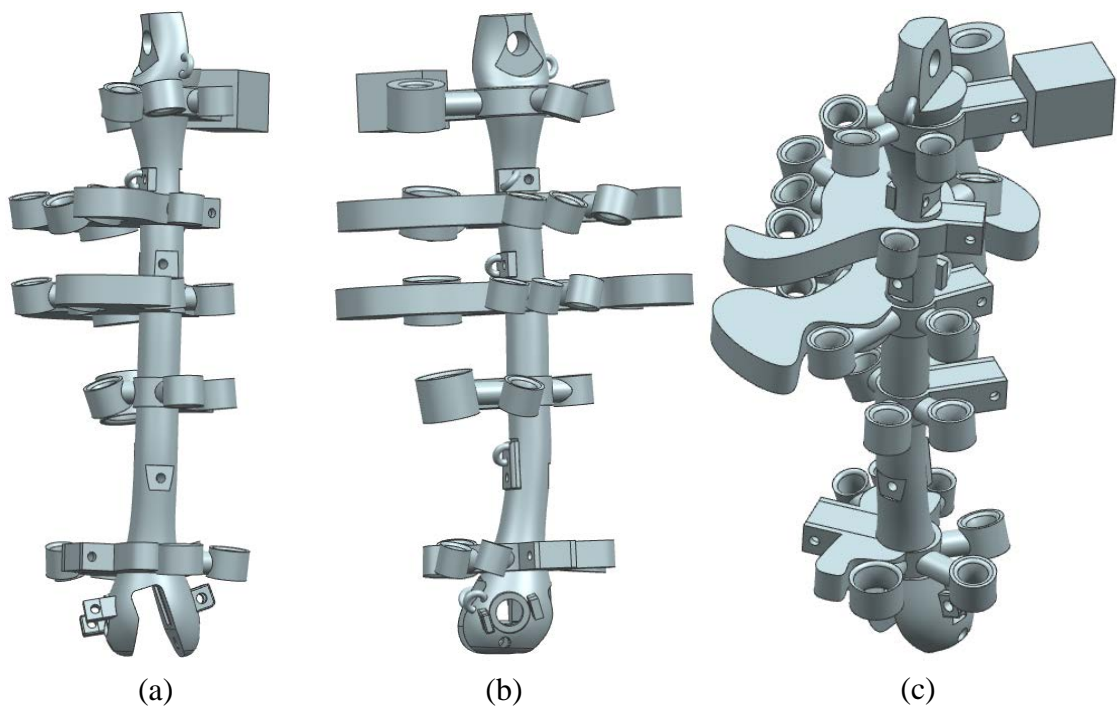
(a) Front, (b) Left and (c) Isometric view of the assembly of left thigh.
